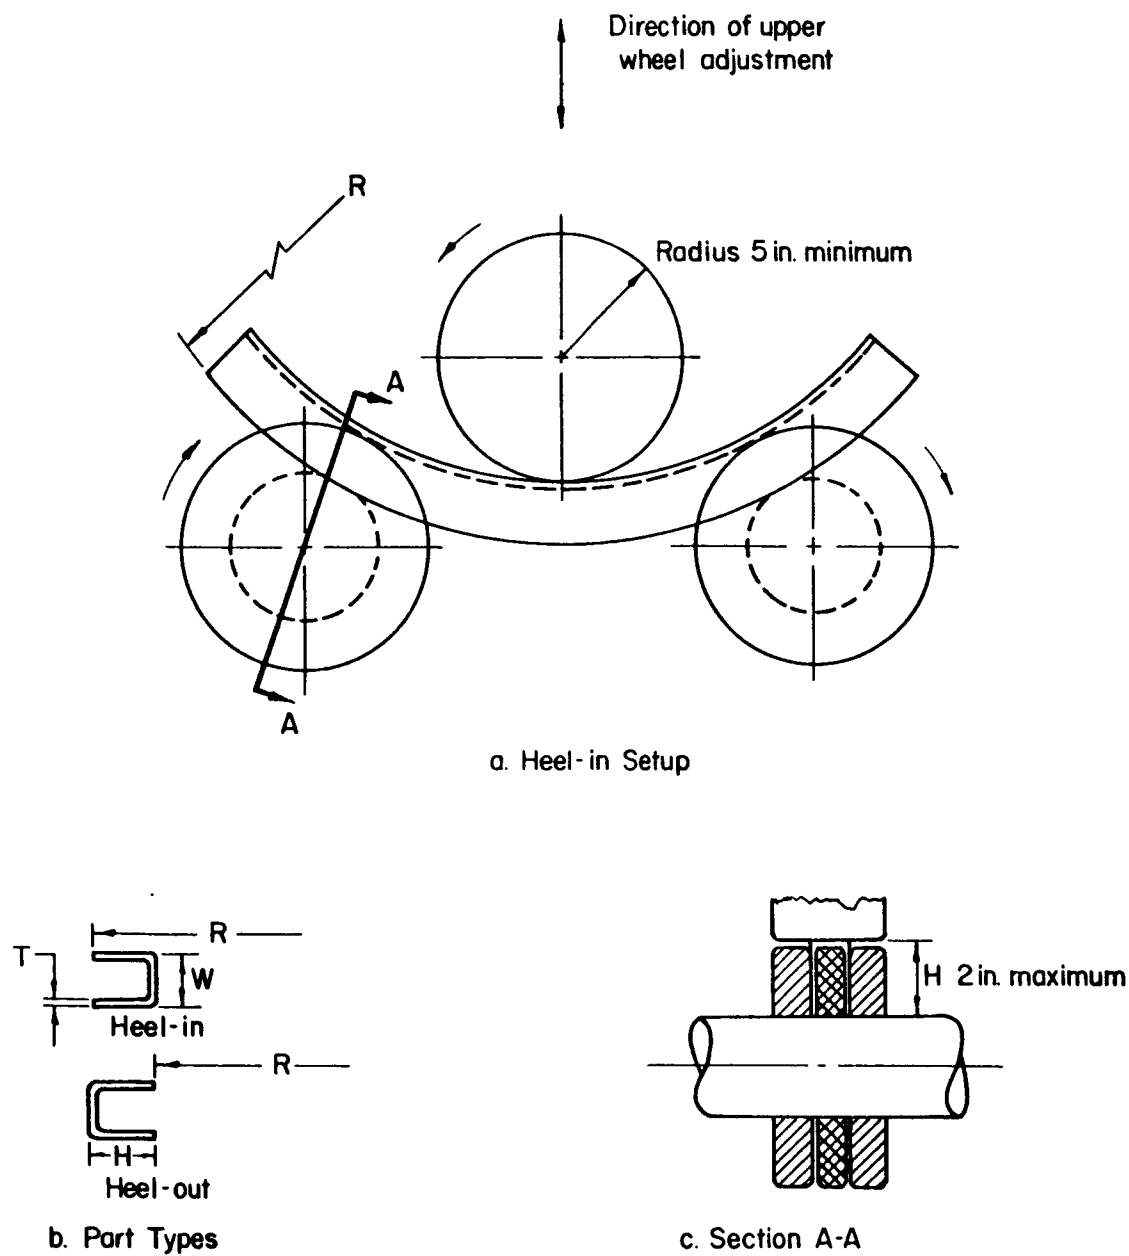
PART TYPES AND SETUP FOR ROLL BENDING (REF. 53)
